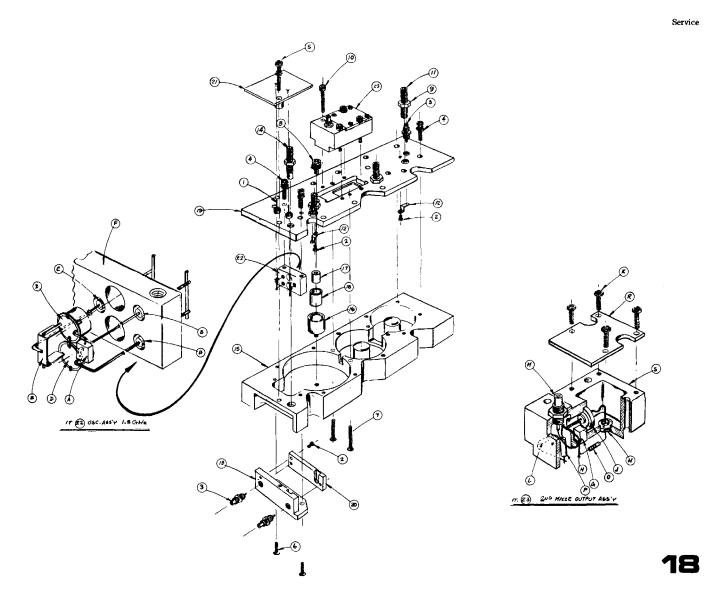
Second Converter Casting, Illustrated Parts Breakdown
